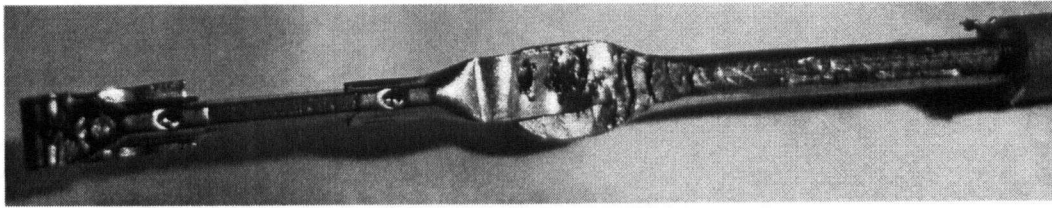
Spot welding the dispenser terminal onto the pre-flattened copper wire.
